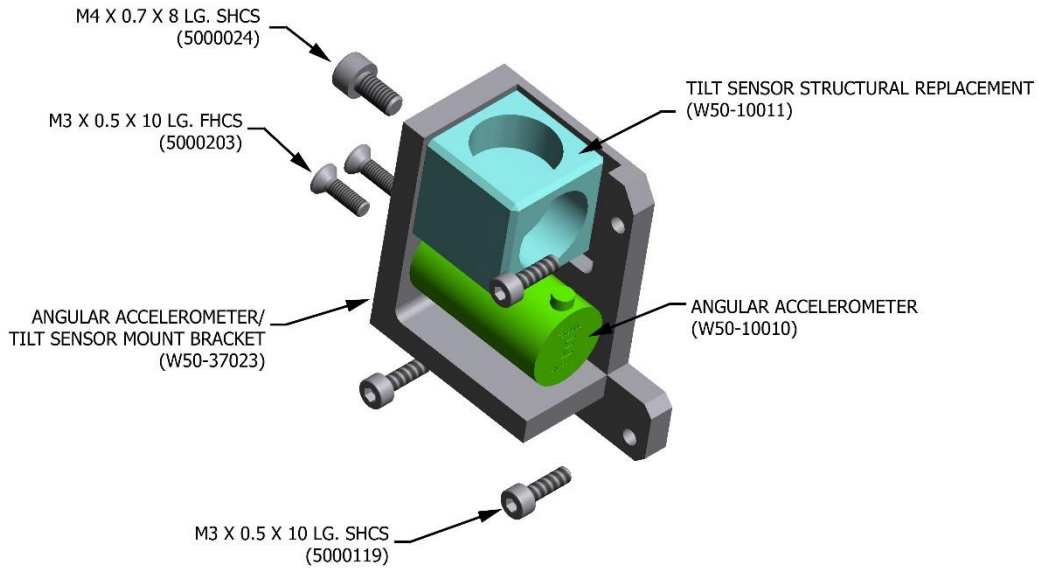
Detaching the angular accelerometer from the angular accelerometer/tilt sensor mount bracket.
